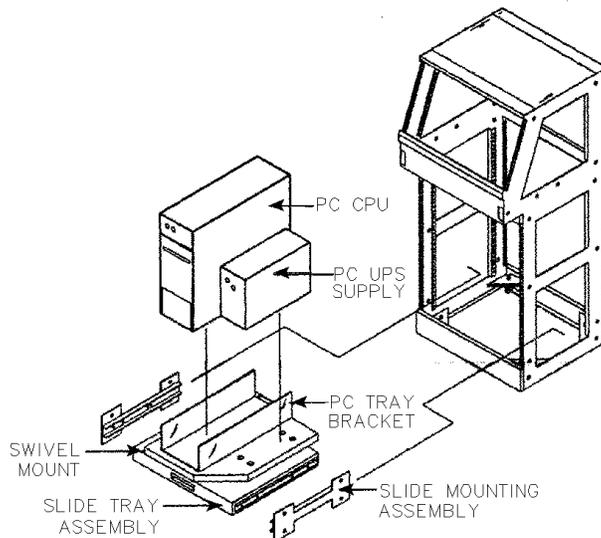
PC AND UPS SLIDE TRAY ASSEMBLY
